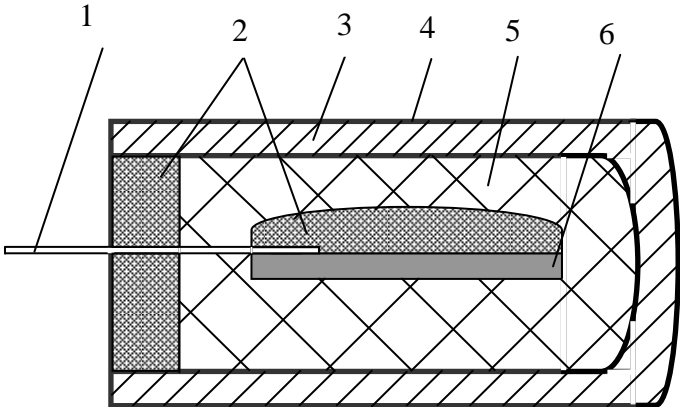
Design of a temperature sensor in the cylindrical aluminium package: 1 – package contacts; 2 – hermetic; 3 – package (aluminium); 4 – package (anodic alumina); 5 – magnesia; 6 – the thermal converter chip
